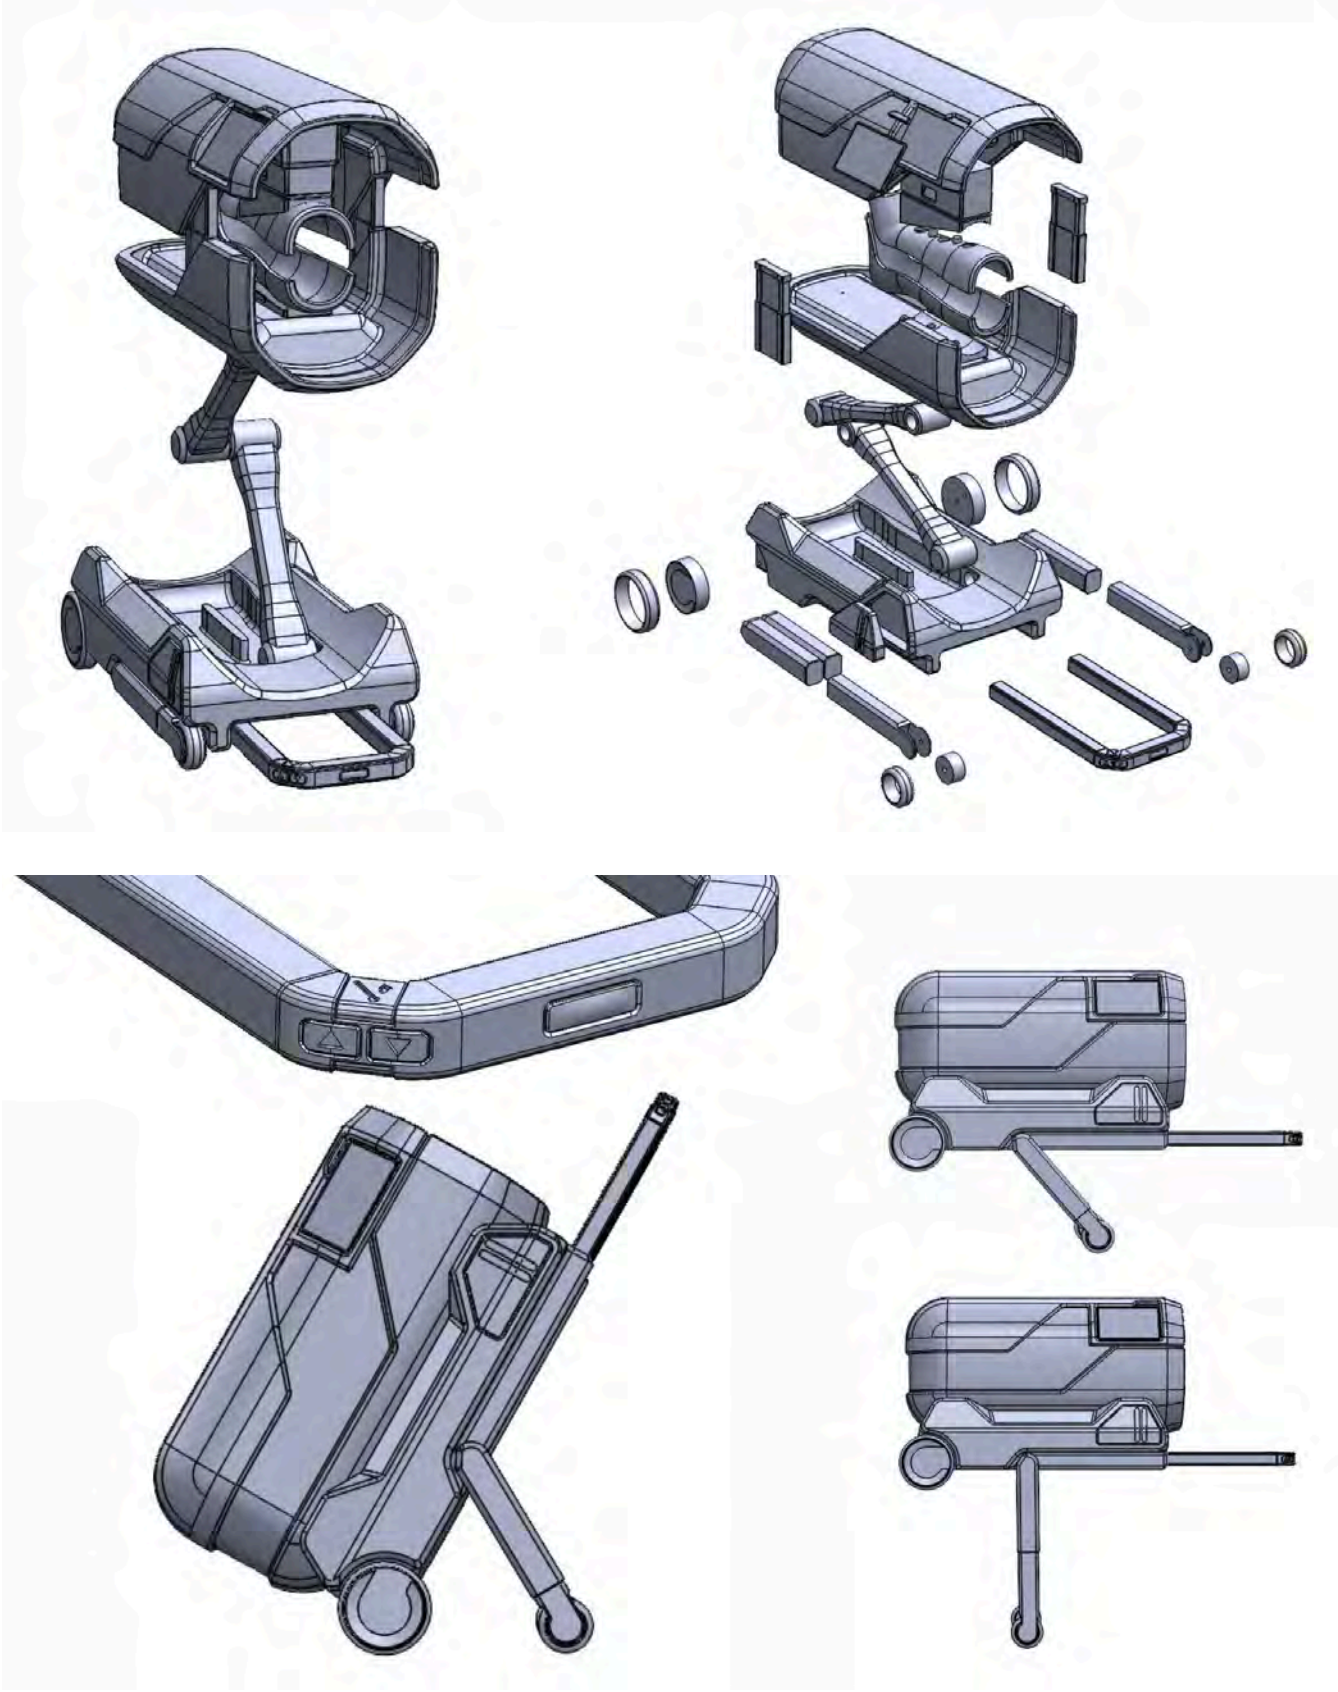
CAD Development: Extended, Exploded, Support Leg Positioning
